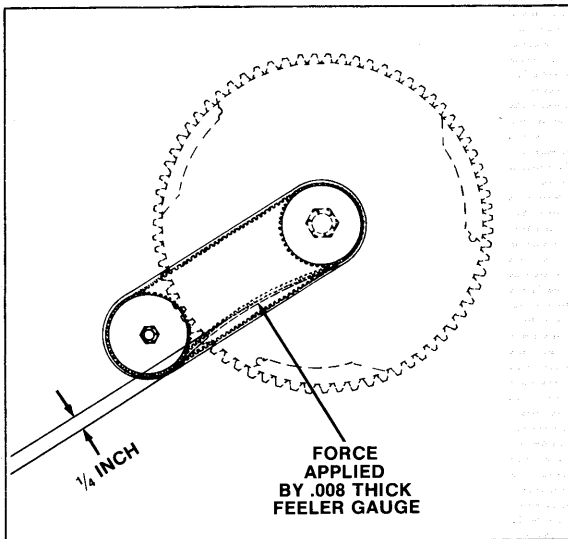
Measuring Belt Deflection Using .008" Thick Feeler Gauge
